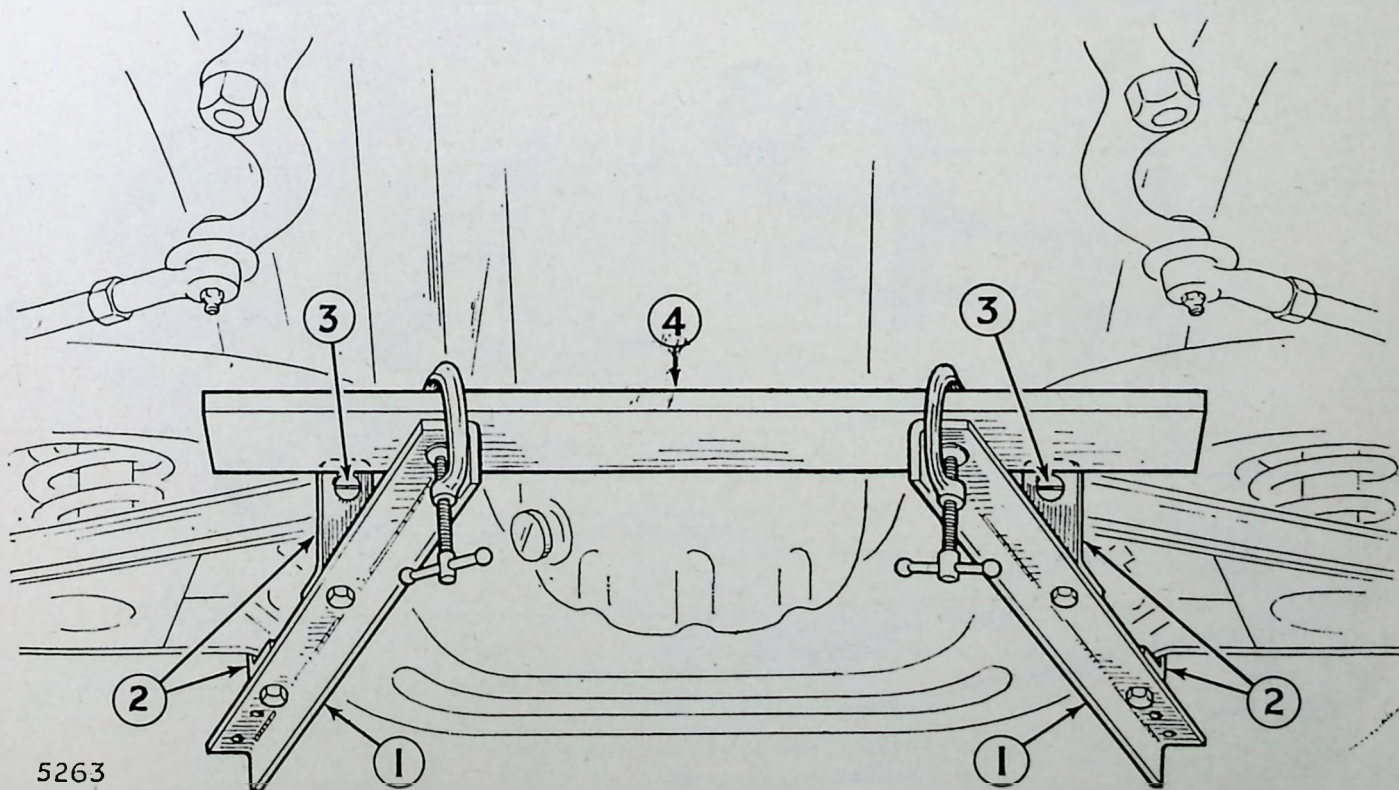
Ball pin height checking fixtures in position. Details of items 1 to 4 are given in figure 12.
